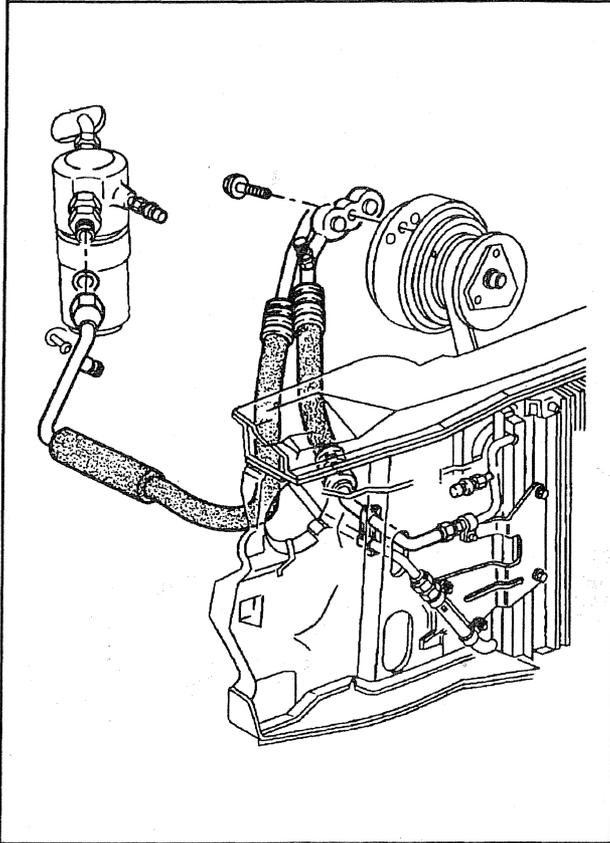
Compressor and Condenser Hose Assembly (Pickup, Extended Cab and Crew Cab)
